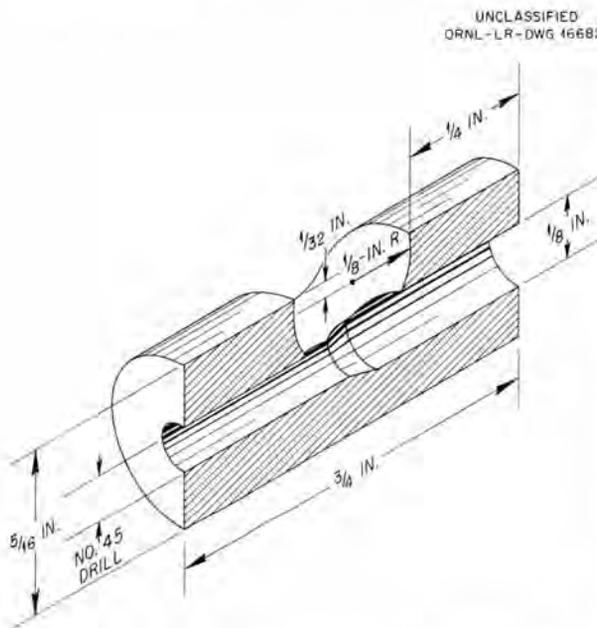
Welding Connectors for Electrical Leads.
